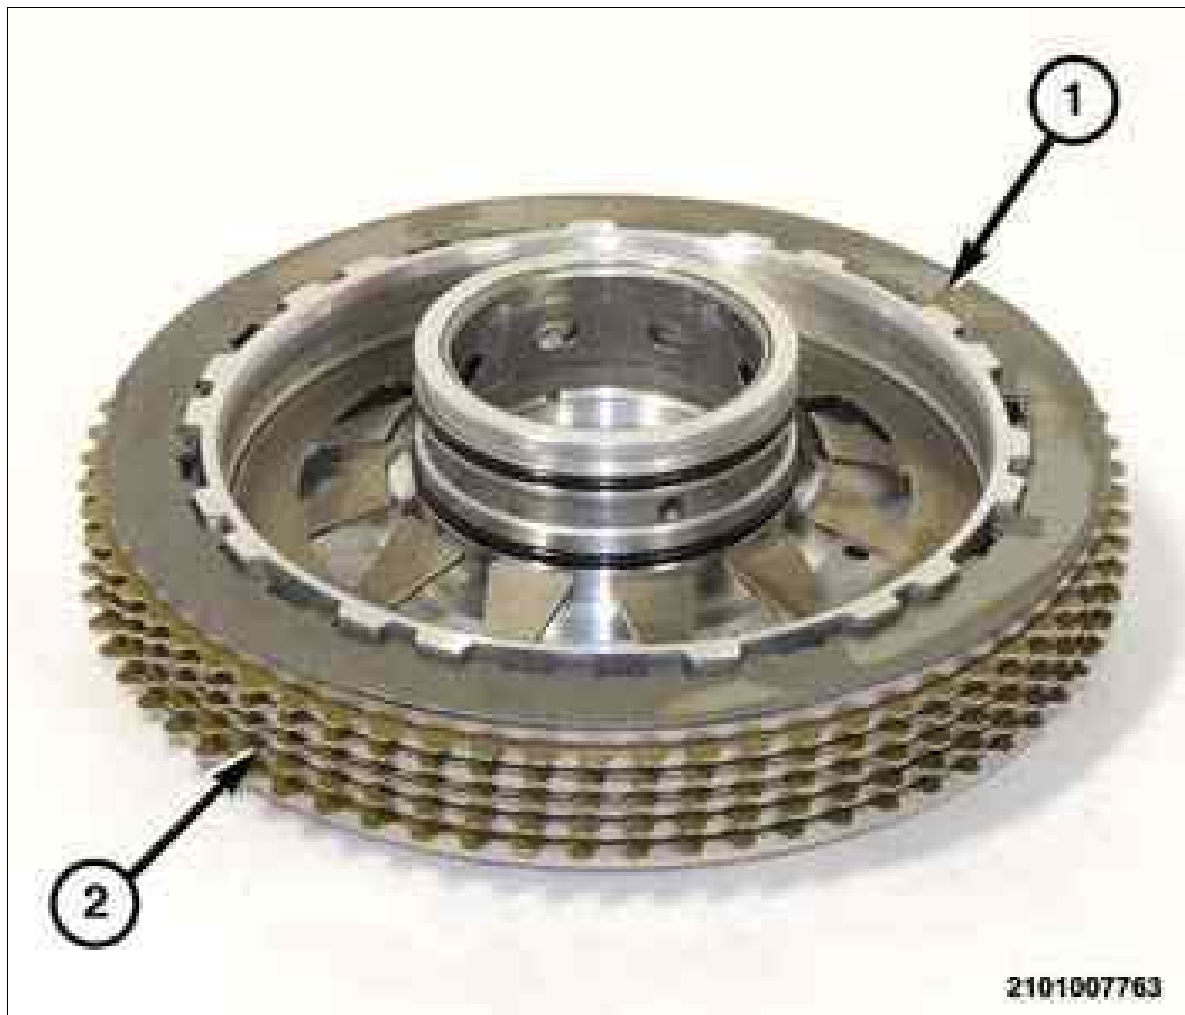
Exploded View Of B-Clutch, Friction Discs & Steel Plates
